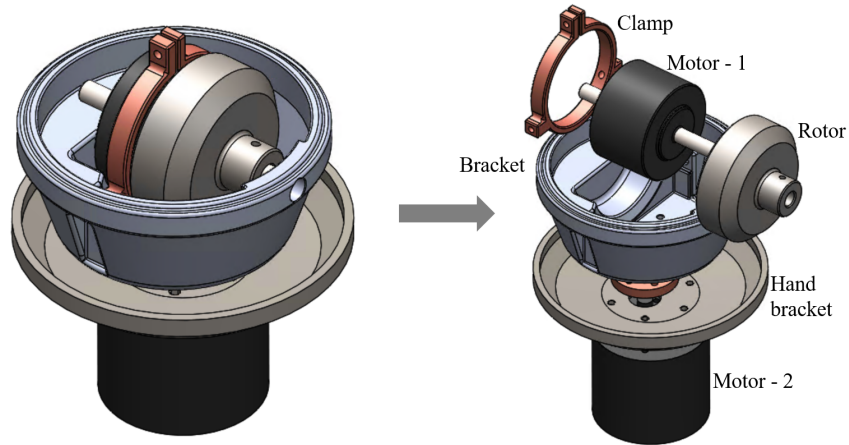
Proof of concept with both rotor and gimbal actuated
